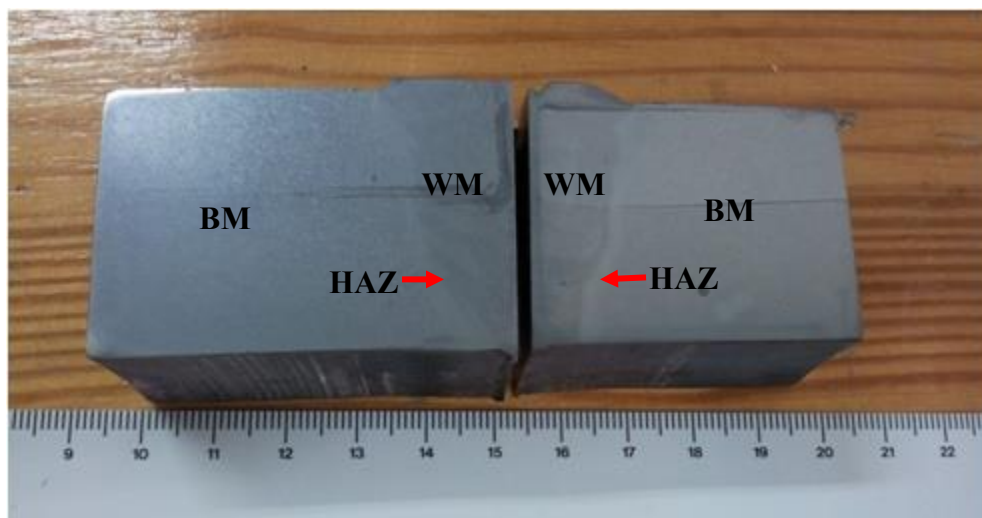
X20 samples sectioned from the weldments. The samples consisted of the BM, HAZ and WM. The HAZ of a weldment is only few millimetres.
